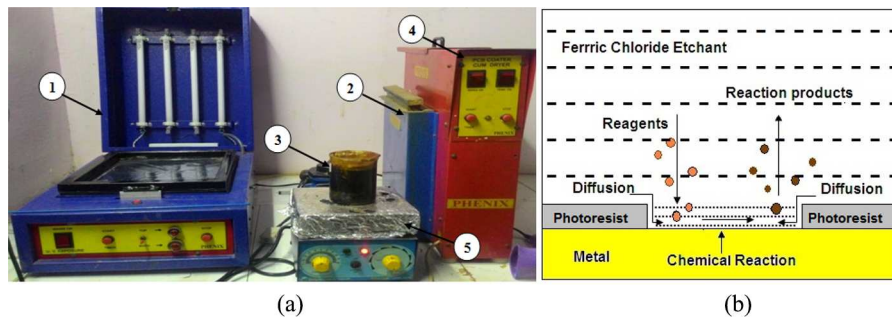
(a) Experimental setup of photochemical machining. 1 Ultraviolet (UV) exposure unit. 2 Photoresist coater. 3 Beaker with ferric chloride. 4 Dryer. 5 Hot plate. (b) Etching mechanism of photochemical machining.
